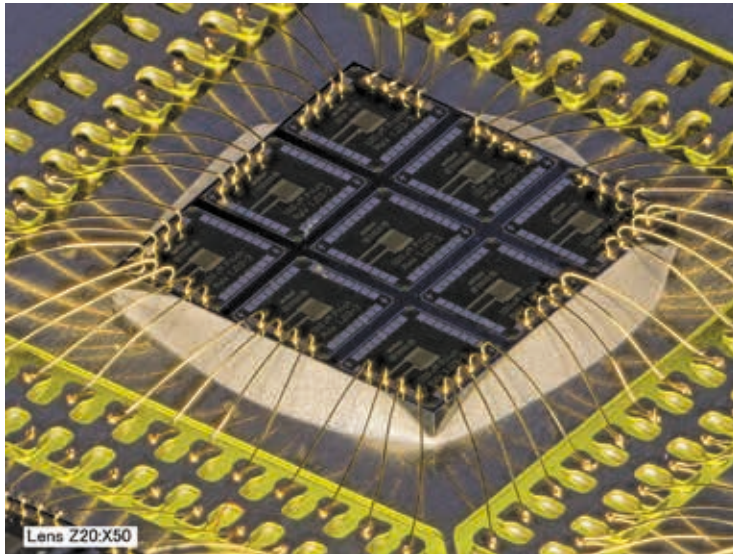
Top view of traditional die attach paste with extensive squeeze out and fillet.
